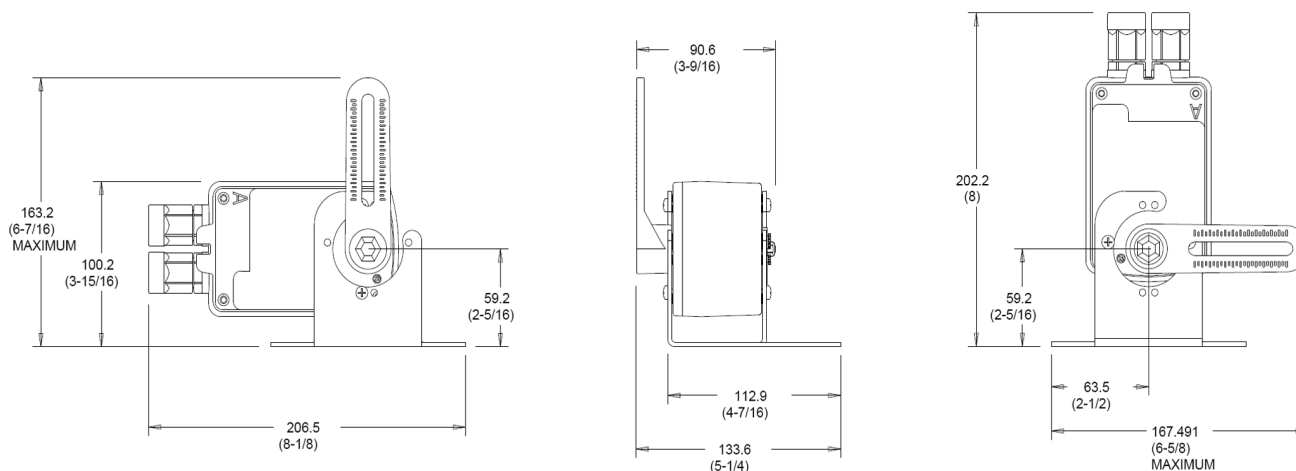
M9203-100 Remote Mounting Kit overall dimensions, mm (in.)
